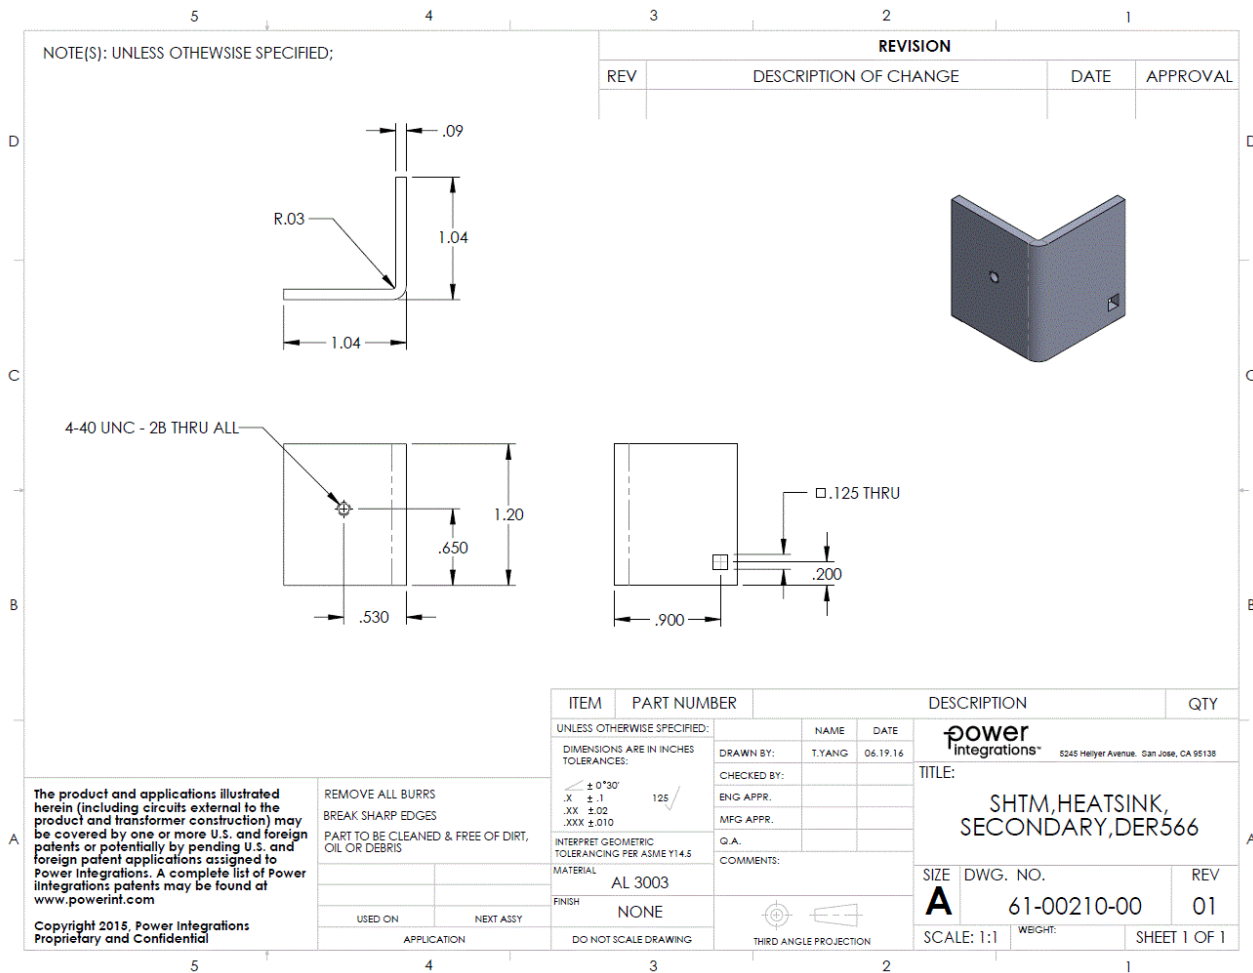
DER-566 Output Rectifier Heat Sink Sheet Metal Drawing.
